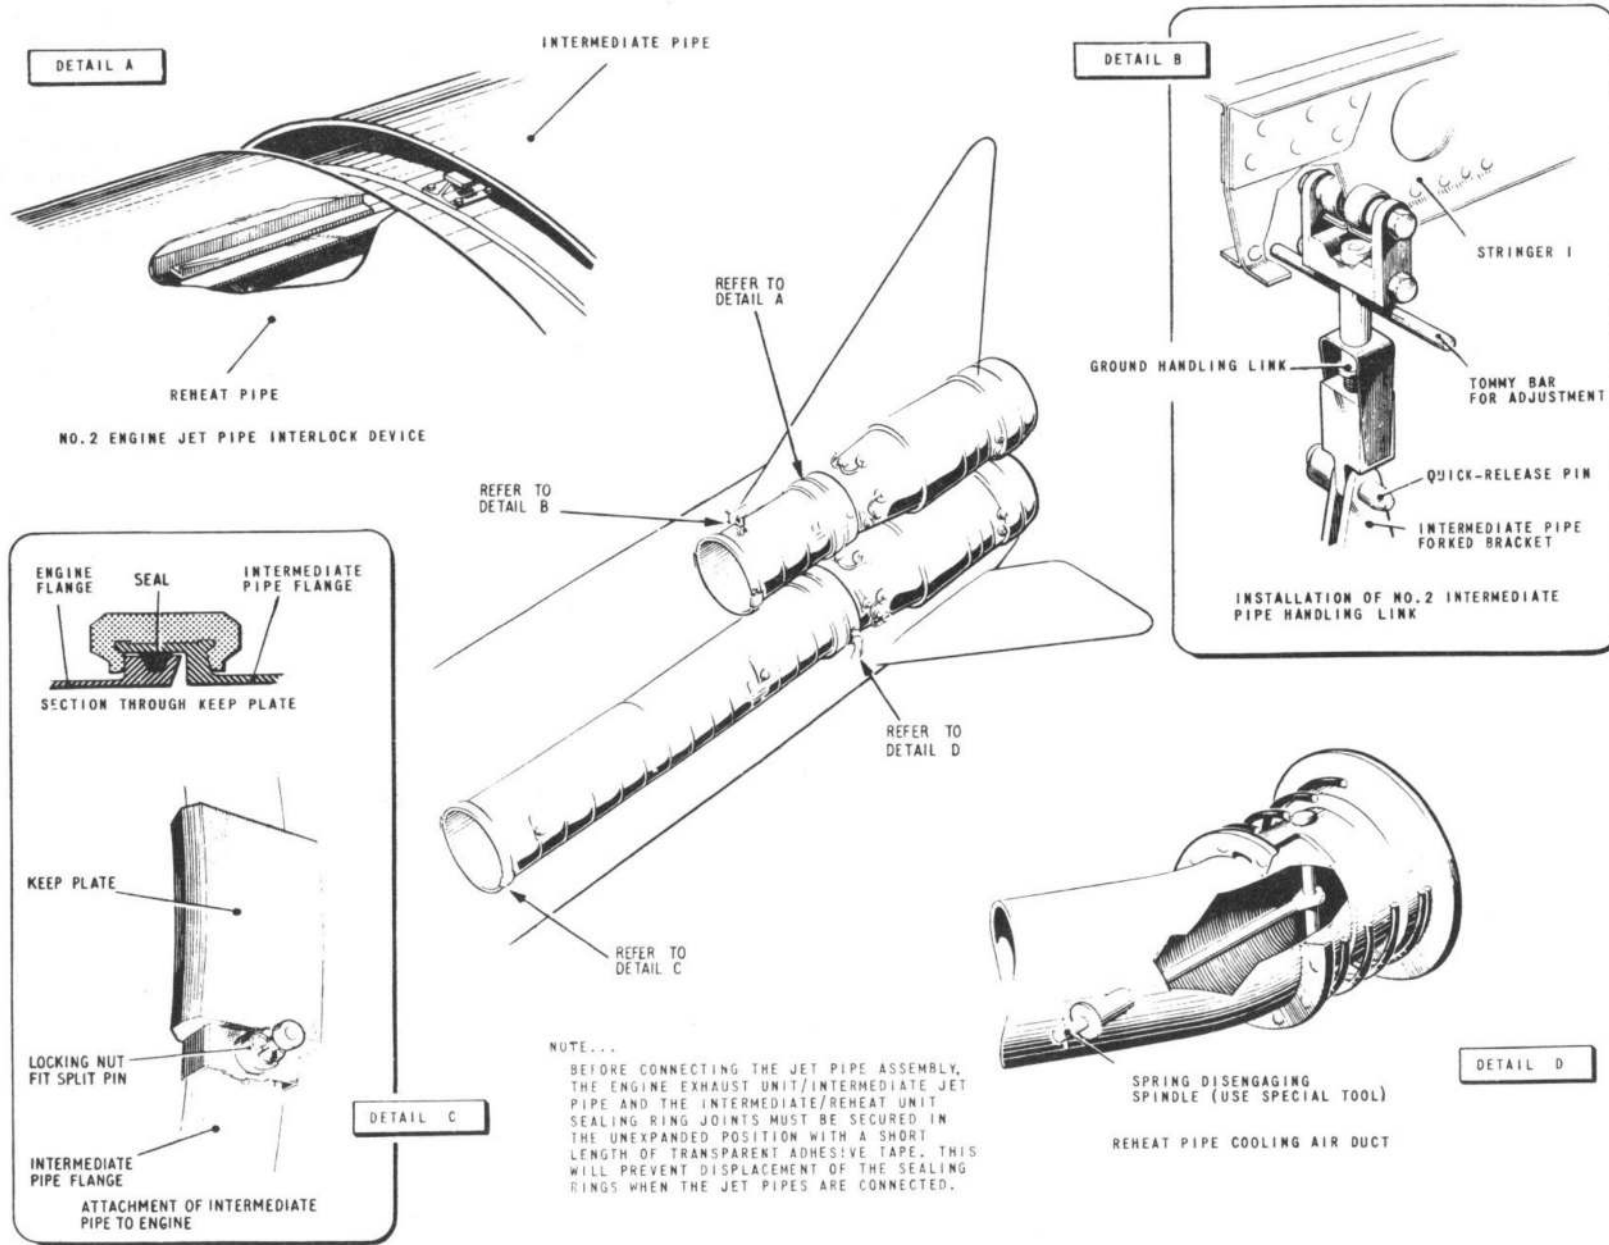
JET PIPE-REMOVAL AND ASSEMBLY (I)
